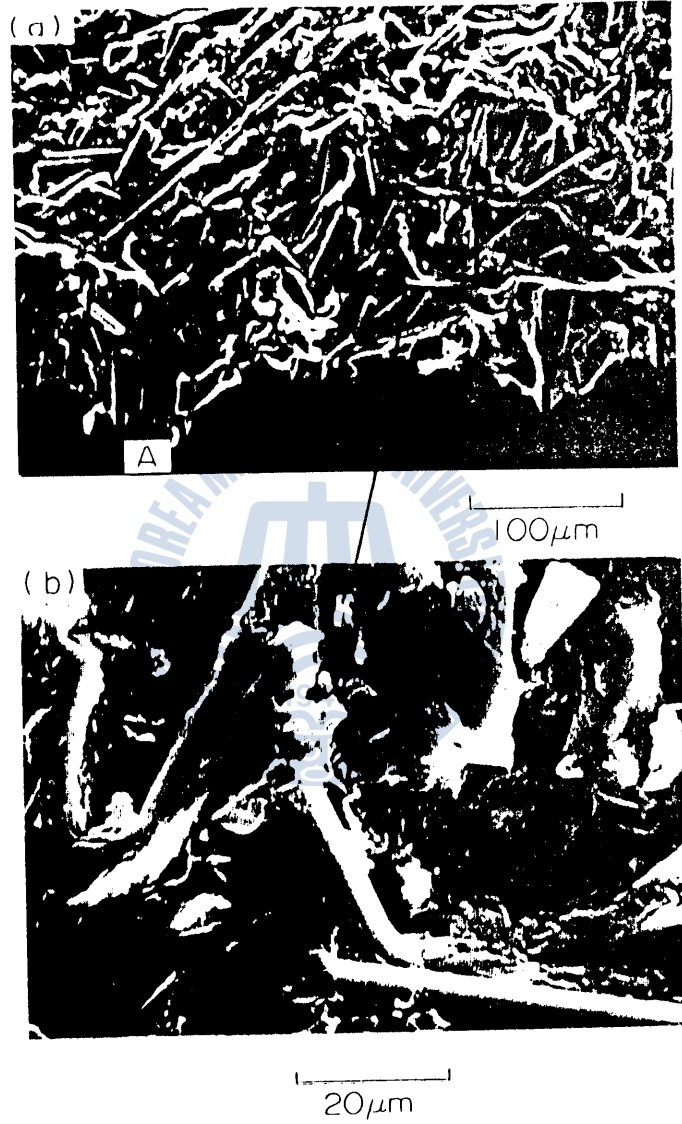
Fracture appearance of a fatigue part for the fatigue specimen.
